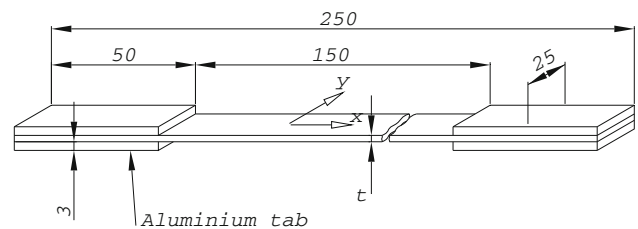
Geometry of tensile and in-plane shear specimens. Notations with coordinates system. Units in mm
